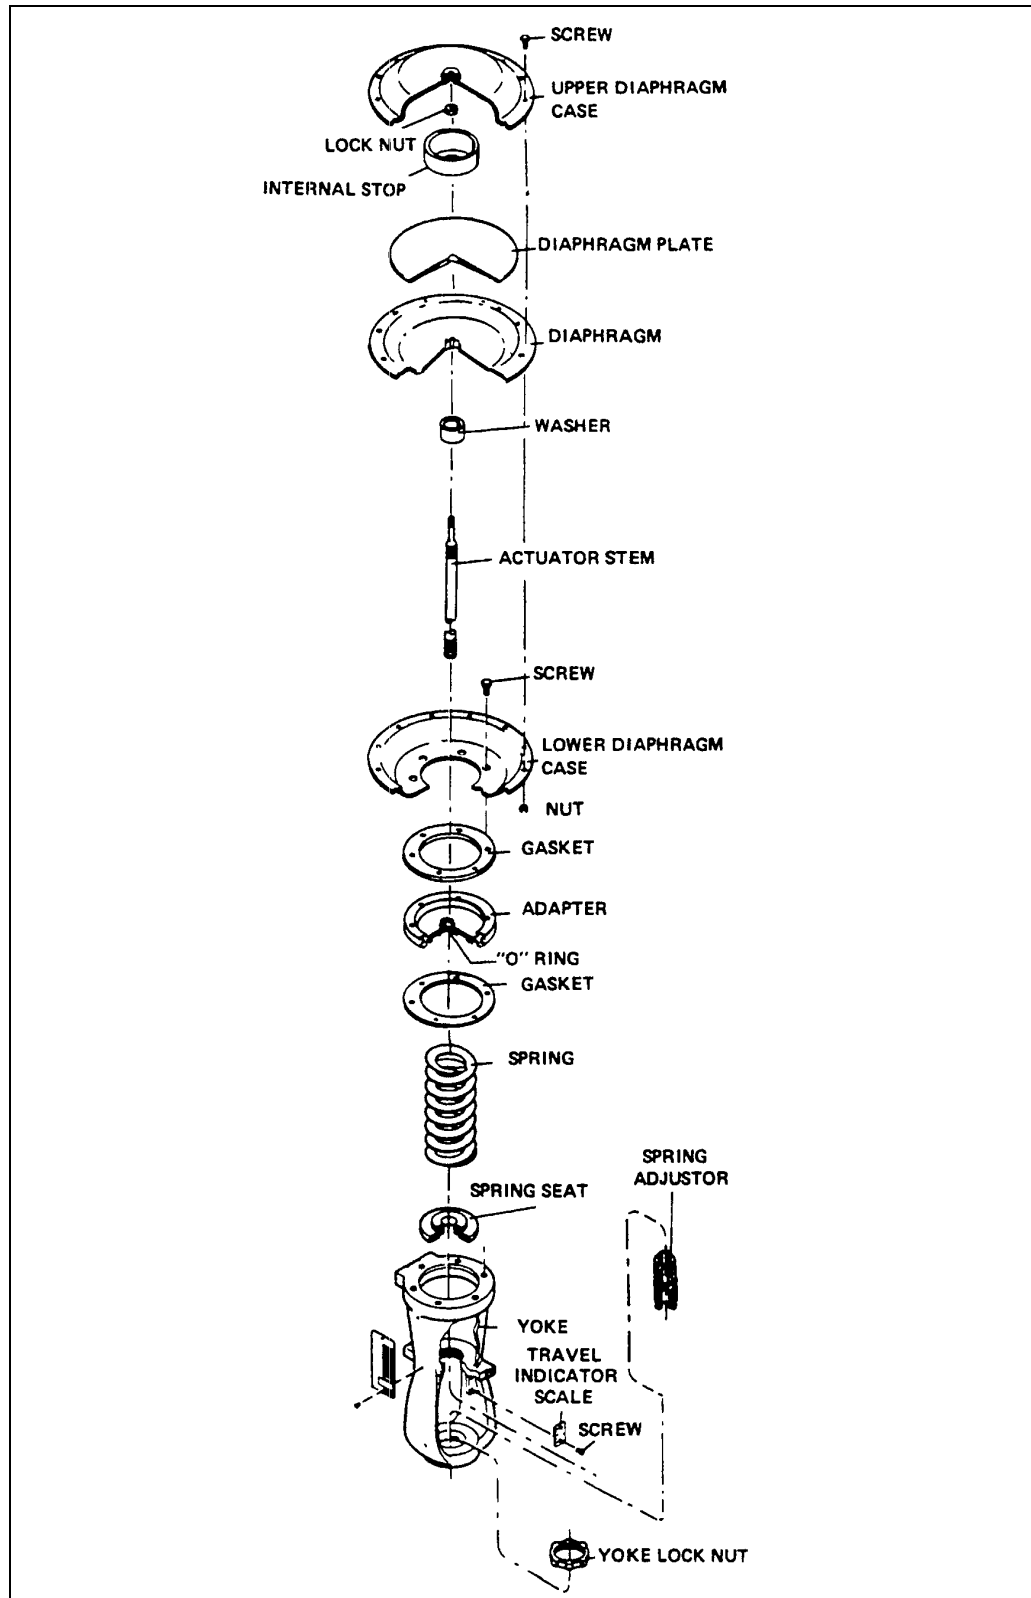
Typical Air-to-Open (Reverse Acting) Actuator Assembly
